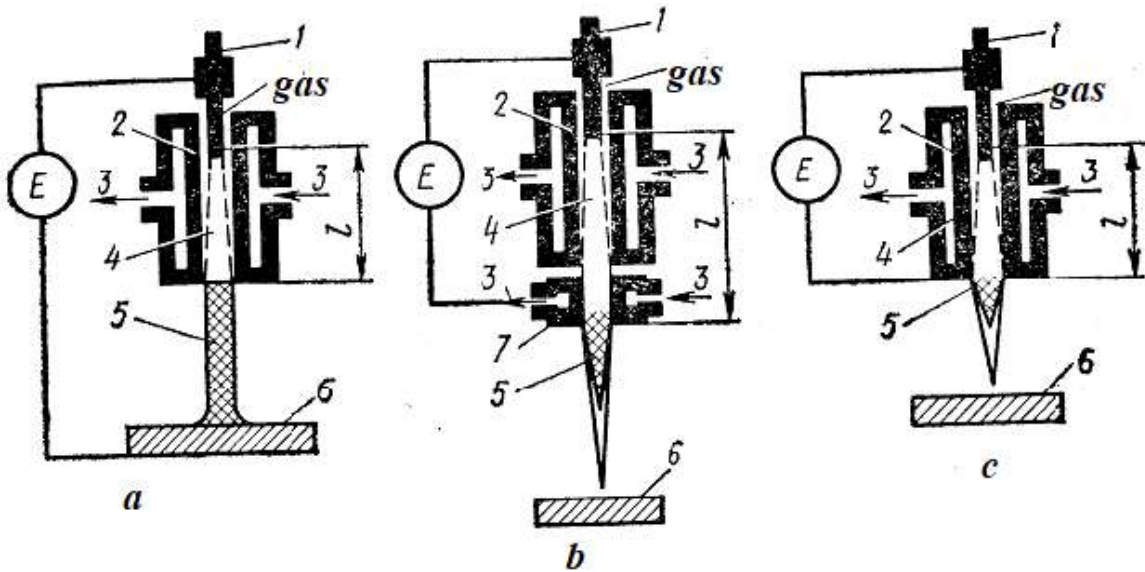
Schemes of plasma arc welding (a) and plasma jet (b, c):
